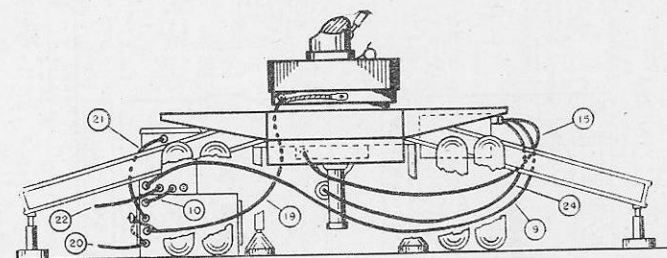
Cable connections below platform on mount. (Numbers on drawing correspond to cable tags. Cables 20 and 22 terminate in power trailer.)
